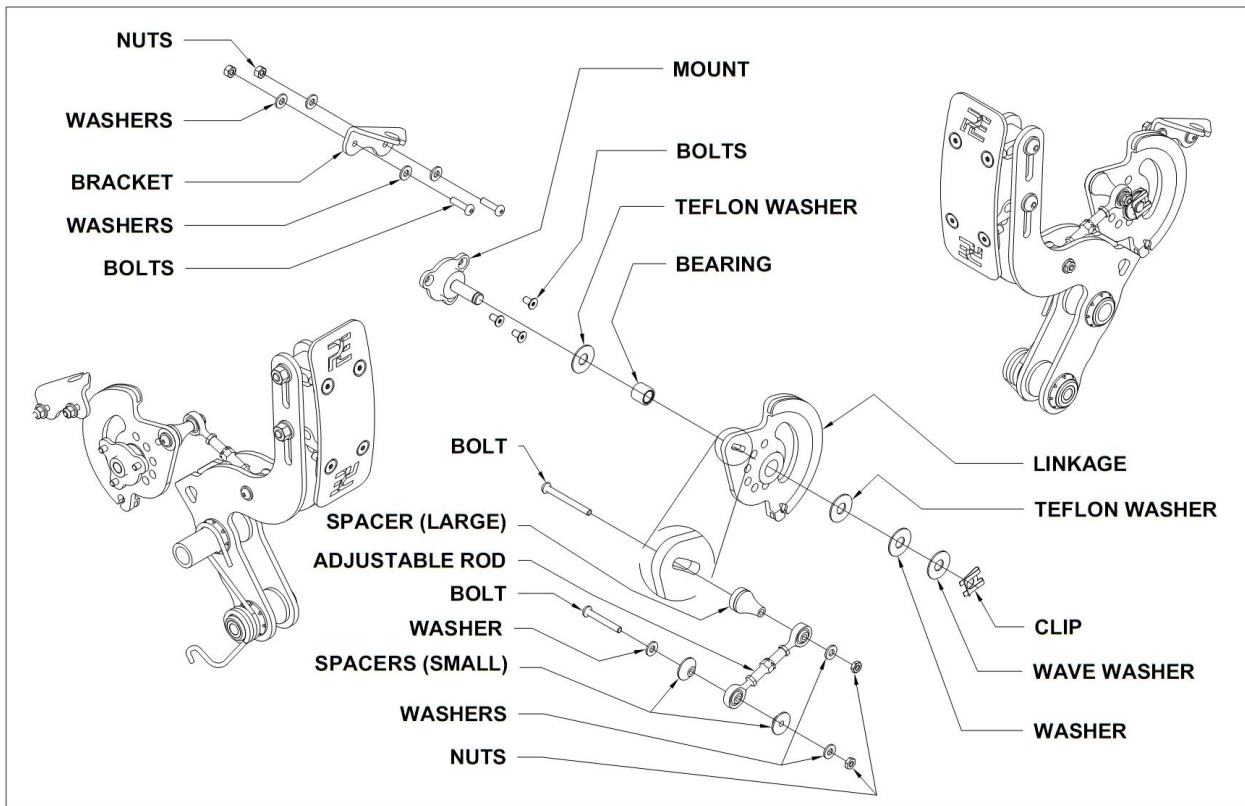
Throttle Cable Parts (PE-005-1001 & PE-007-1001)
